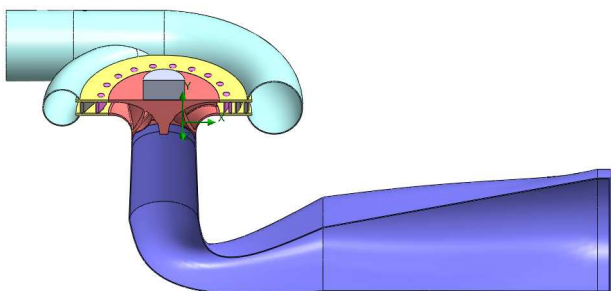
Three dimensional CAD model of the turbine assembly in the target hydropower plant
